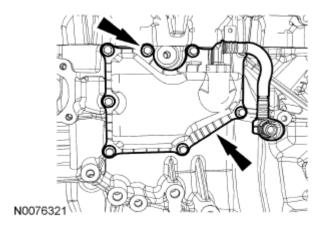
Locating Coolant Hoses Courtesy of FORD MOTOR CO.
